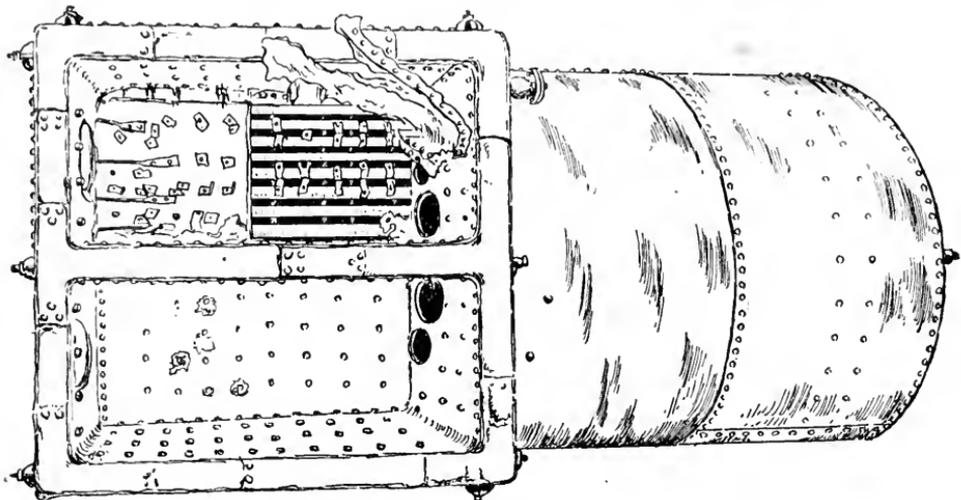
THE EXPLODED BOILER, SEEN FROM BELOW.
